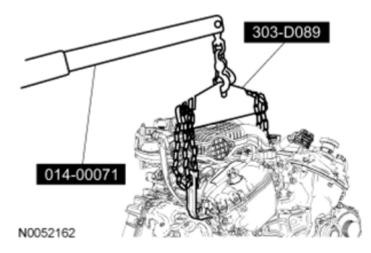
Identifying Heavy Duty Floor Crane And Spreader Bar Courtesy of FORD MOTOR CO.
